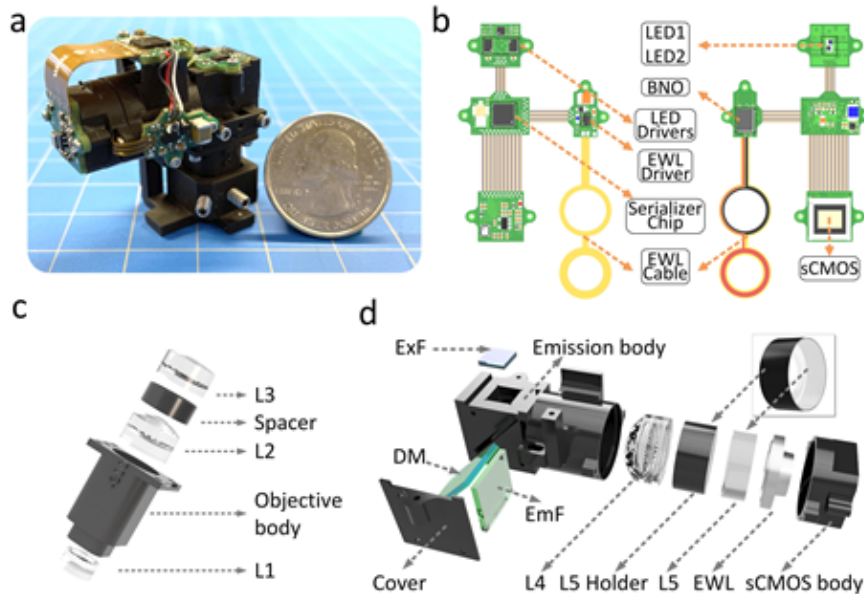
Design of Large FOV miniscope. (a) Photograph of LFOV miniscope with baseplate. (b) Electronic PCBs of LFOV miniscope includes CMOS sensor, serializer, dual-LED, and EWL&BNO boards with rigid flex pcb connected for I2C command and data transmission. Circuit module consists of four main pcb boards, LED pcb, EWL&BNO pcb, sCMOS pcb, and Serializer pcb. Two leds are soldered on to led pcb board driven by two led drivers and I2C digital potentiometer for brightness adjustment. EWL&BNO pcb has EWL driver, with EWL cable holding the EWL, to adjust the focus of the EWL and BNO head orientation chip for collecting head orientation data. 5M sCMOS sensor (MT9P031) is soldered on the sCMOS pcb for Ca⁺⁺ fluorescence image capturing. Serializer chip on the serializer board transfers the parallel data set from sCMOS to serial data with a coaxial connector soldered to communicate with UCLA DAQ board. (c) Objective module of the miniscope. Objective module contains a 3D printed body to hold the components and three achromatic lenses (L1, L2, and L3) with a spacer between the second and the third lens on the top. (d) Emission module of miniscope. Emission module consists of 3D printed bodies (a cover, a L5 lens holder, and a CMOS holder) to hold the filters, lenses and CMOS sensor, and optics components. Optics group refers to filters (excitation filter (ExF), dichroic mirror (DM), and emission filter (EmF)), optics lenses (achromatic L4 and plane-concave lens L5), and electrowetting lens (EWL).
